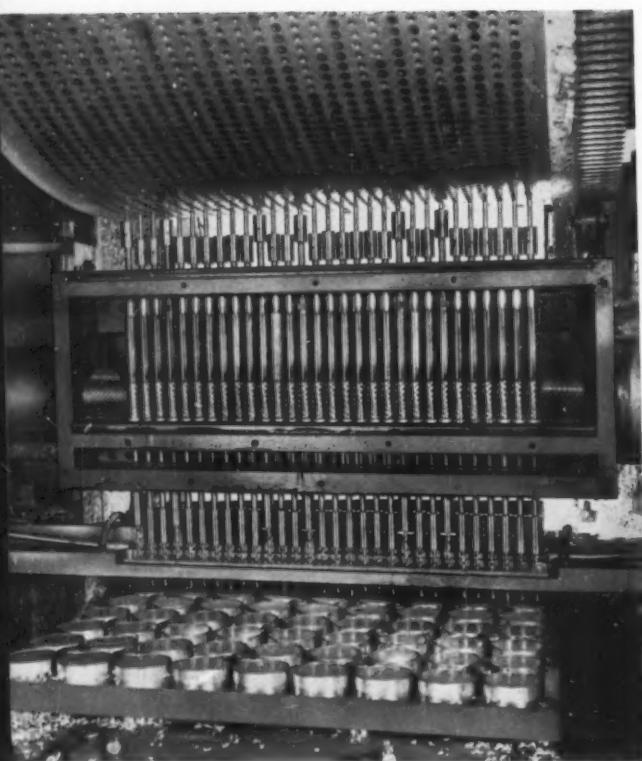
Work-table and drill head are mounted on the same slide. As they approach the selector drum, those spindles aligned with template holes pass through; those aligned with dimples are halted, then contact the still-rising work-pieces.
